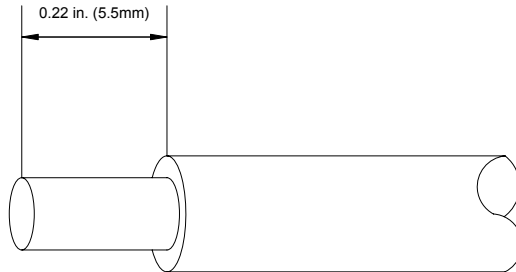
Connecting Wire End for Terminal Blocks TA1 and TA2 Side
